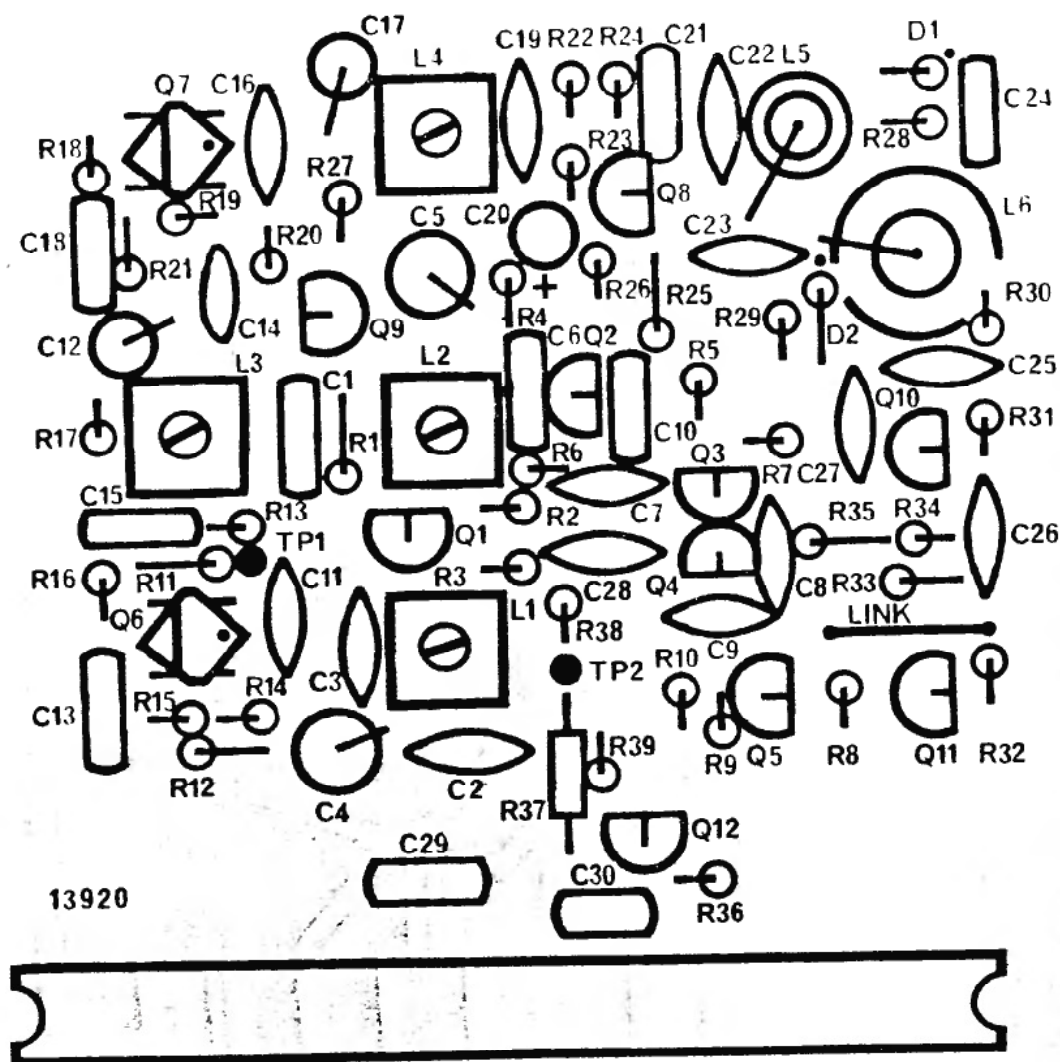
NOISE BLANKER PCB LAYOUT DIAGRAM
